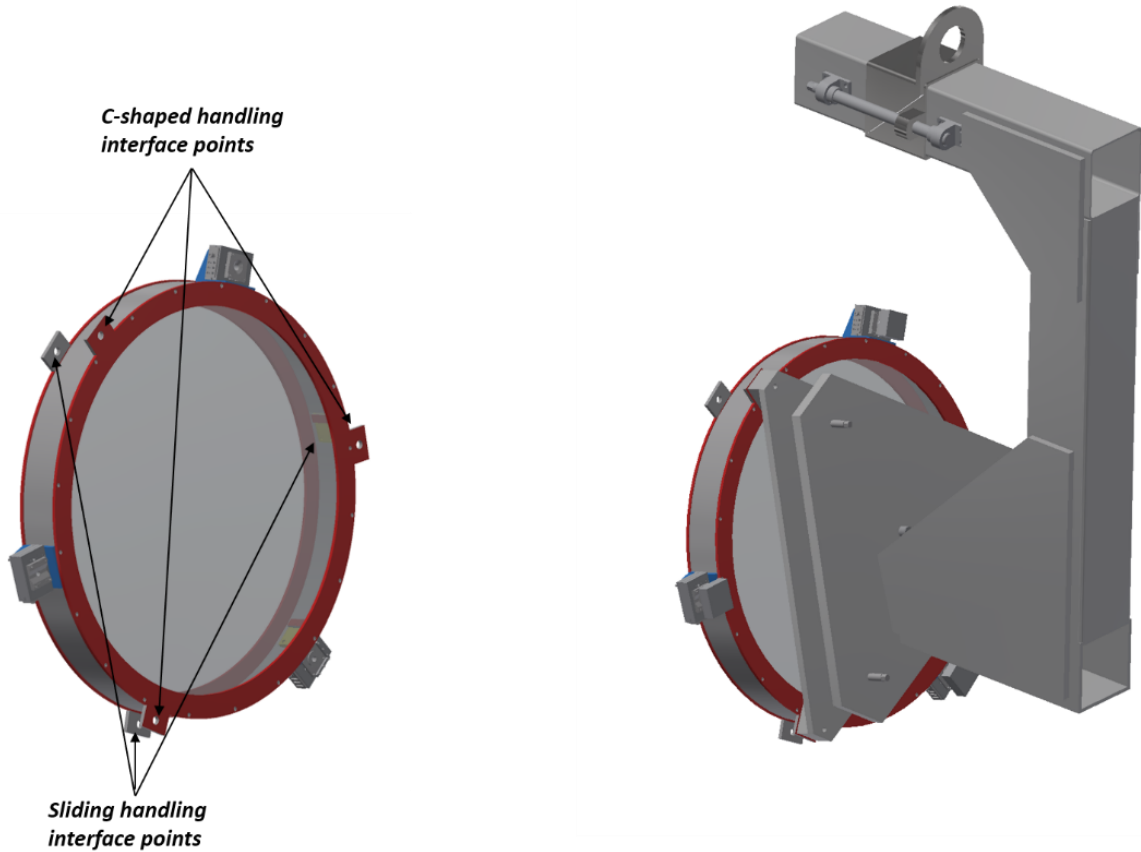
the C-shaped handling used to position the dichroic on the rail system
